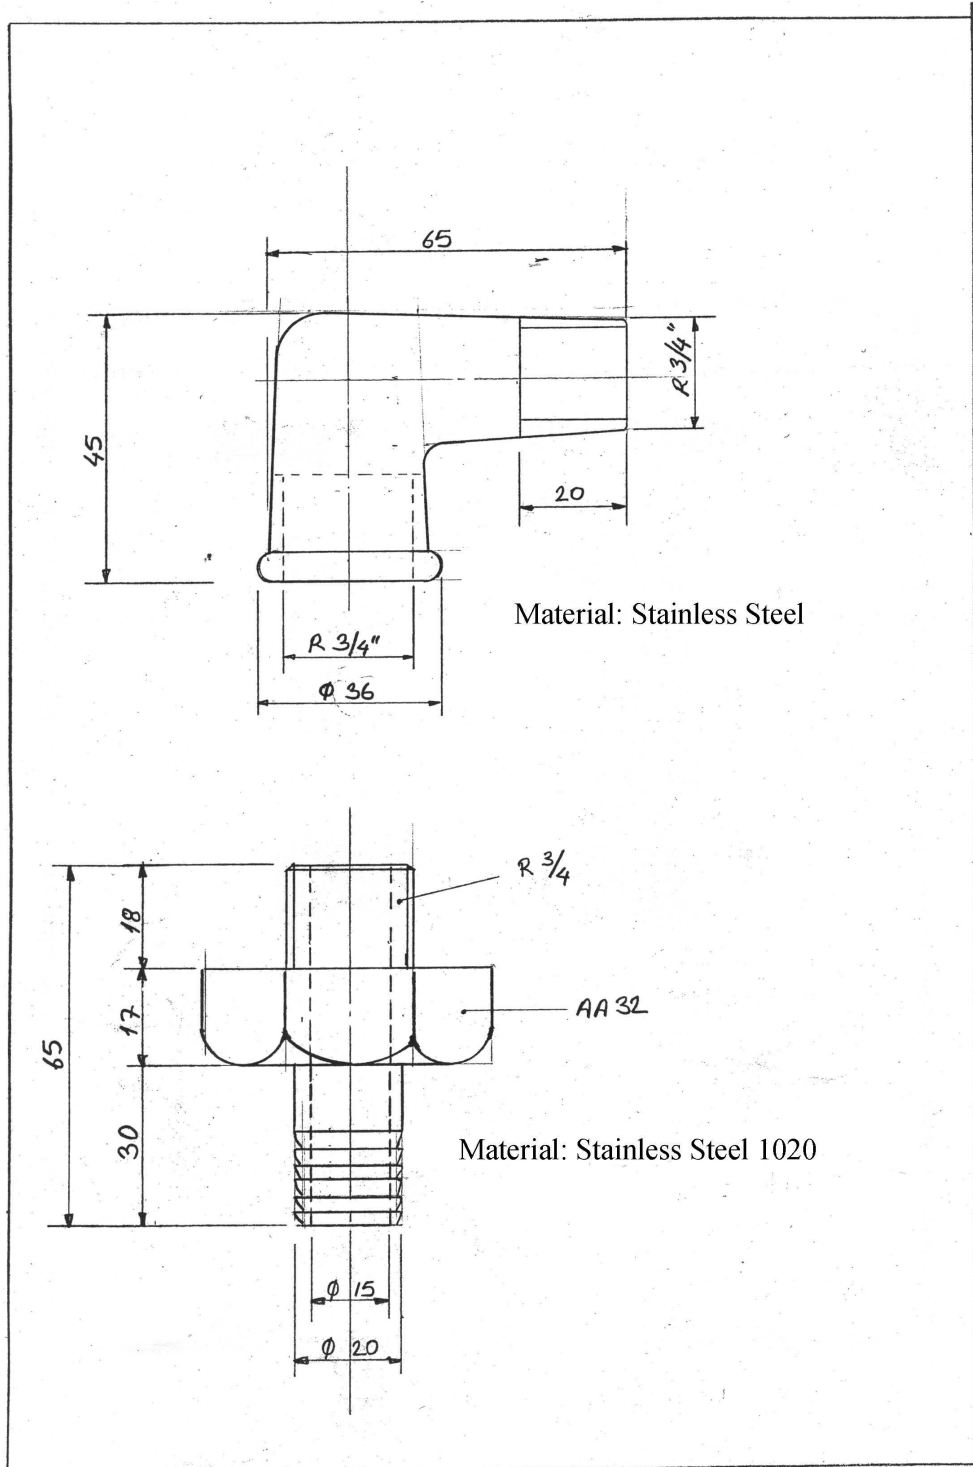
Technical drawing of pipes for pressure slip cast set-up
